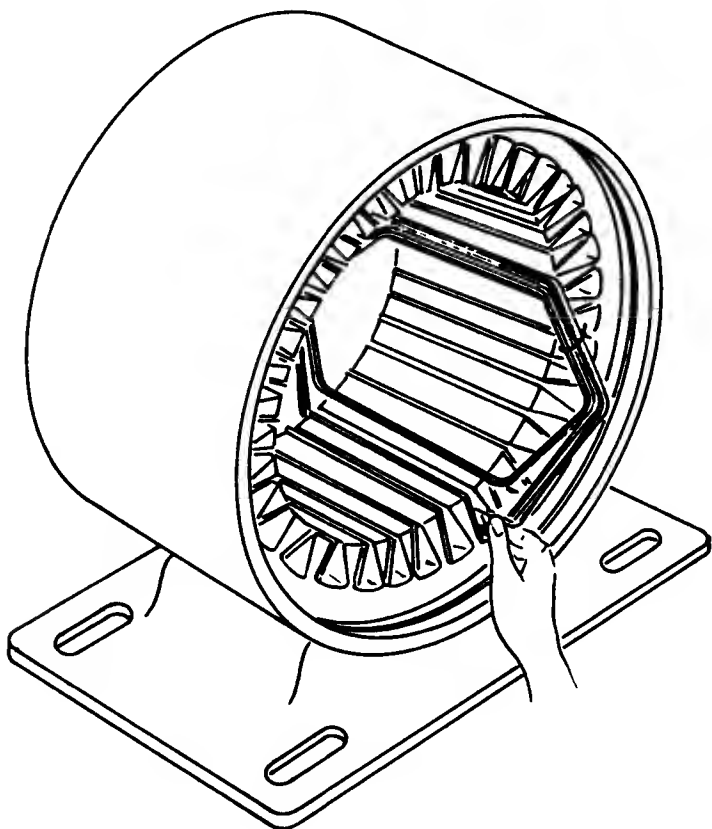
Shaping a pattern wire used to set diamond-shaped winding head.
